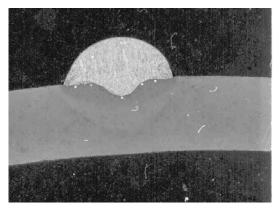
Weld A63 Macro, 1.29 kJ/mm, 2.5X Mag.
